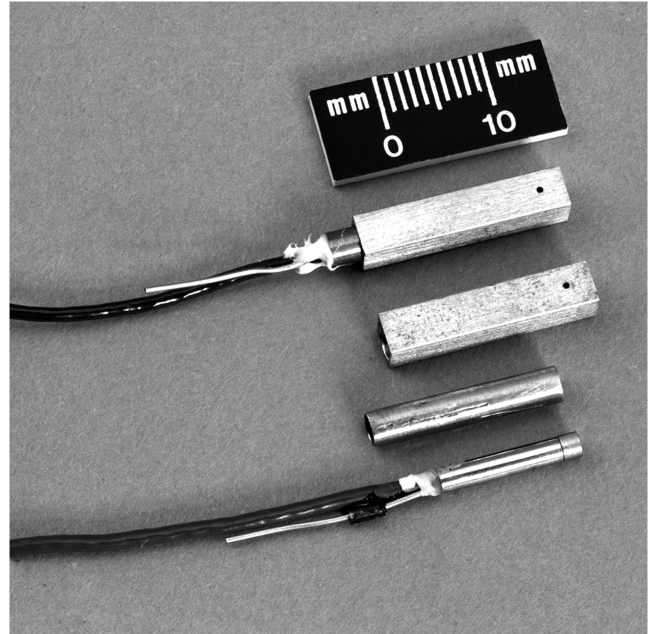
Unsteady pressure sensor installation components from bottom to top: pressure sensor, protective metal sleeve, rectangular mounting block with orifice hole, and assembled fixture.
